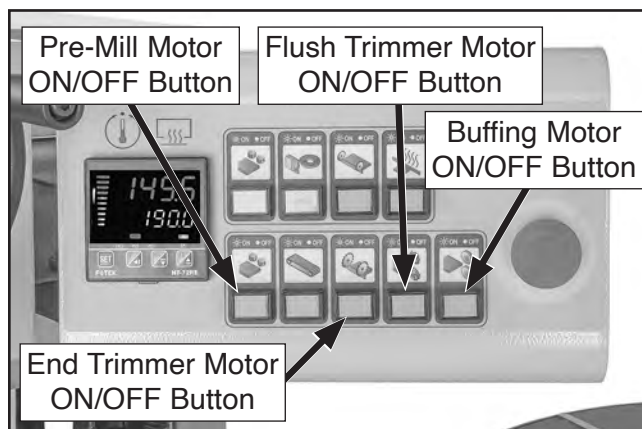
Location of pre-mill, end trimmer, flush trimmer, and buffing motor ON/OFF buttons.
